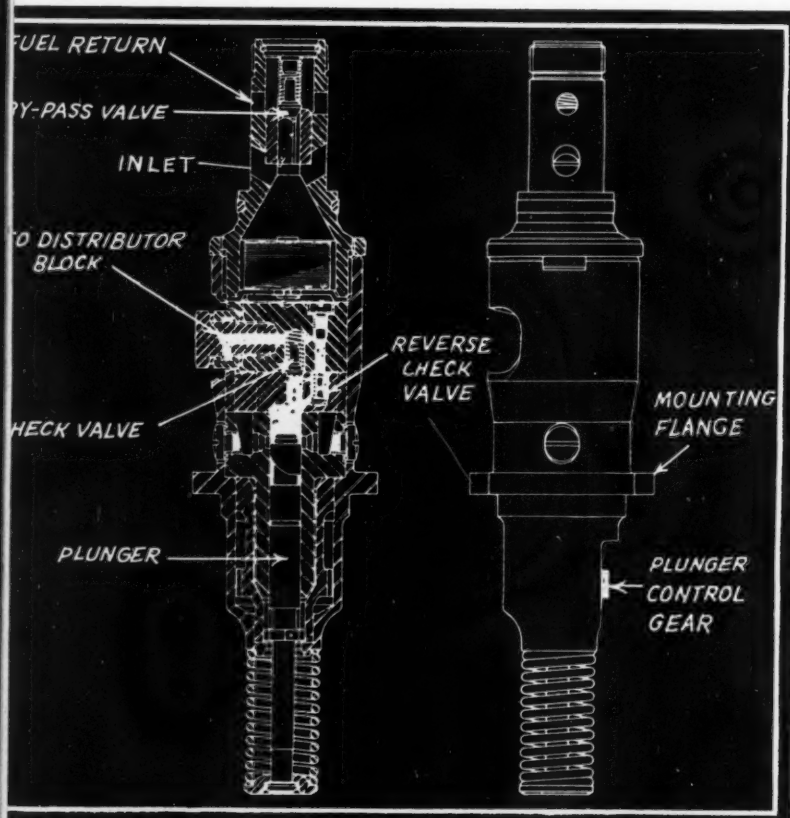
Above — Skeleton view of pump mechanism. Housing is not shown
